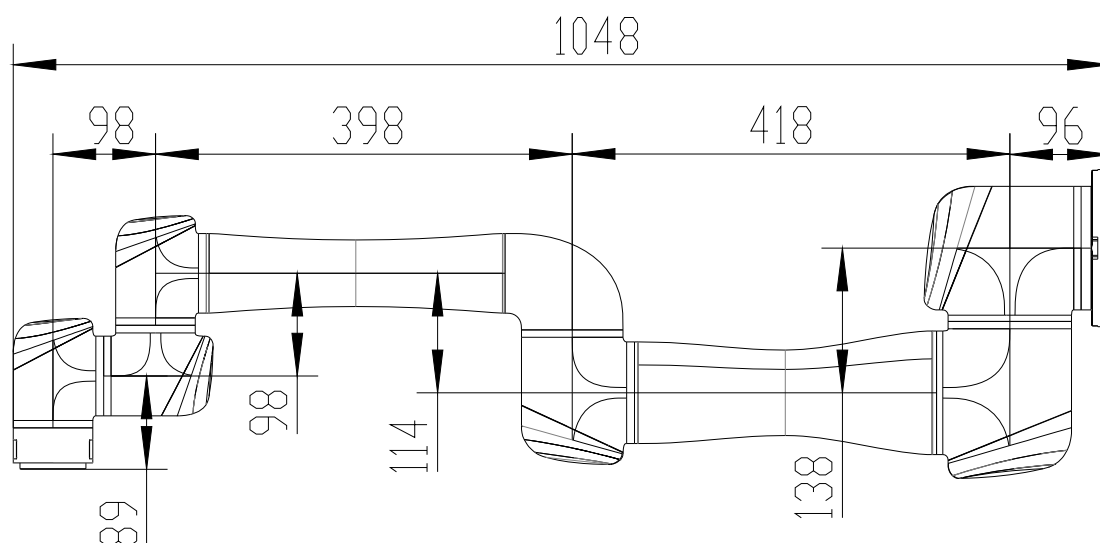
Mechanical dimensions diagram of the EC66 robot, with unit of mm
